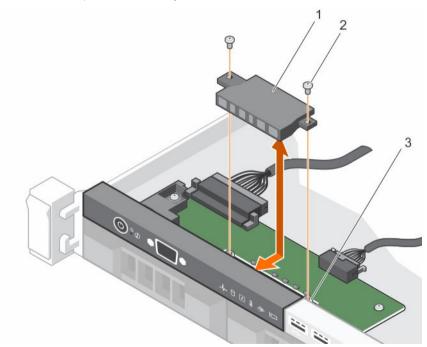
Removing and installing the LED module—four cabled hard drive chassis
